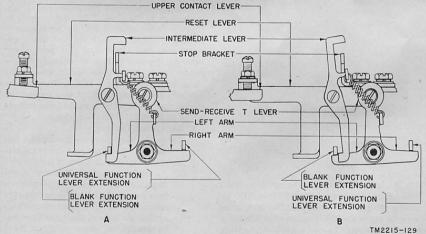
Typing unit parts of SEND REC BREAK mechanism.
